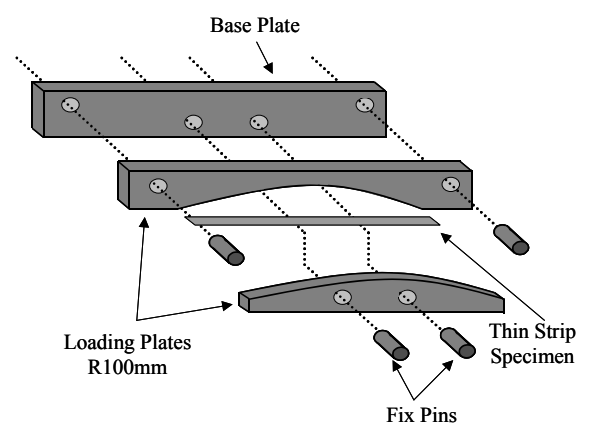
Schematic illustration of specimen and fixture of BSR experiment.
